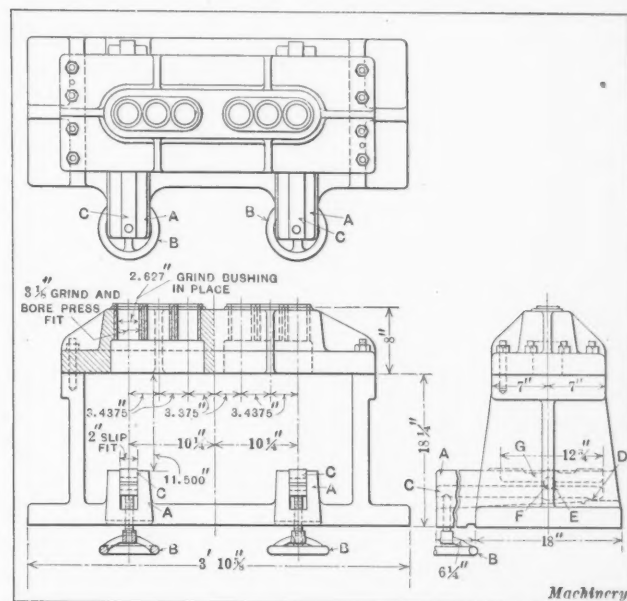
Design of Work-holding Fixture used on Machine shown in Fig. 5
